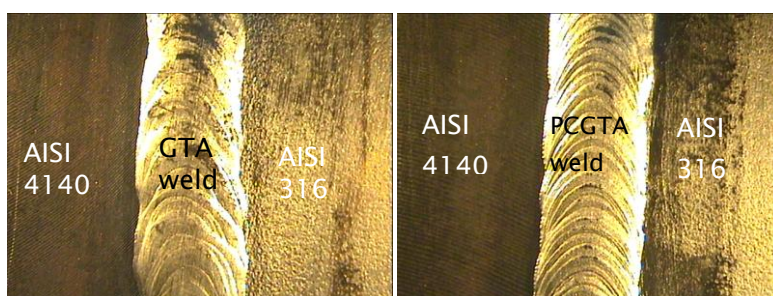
Photo–Macrograph of the GTA and PCGTA weldments of AISI 4140 and AISI 316 employing ER 309L filler
